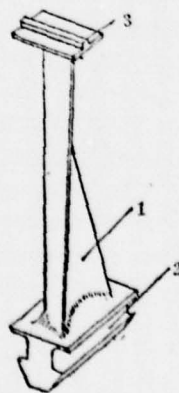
Turbine blade: 1. body; 2, arrow head; 3. crown.
